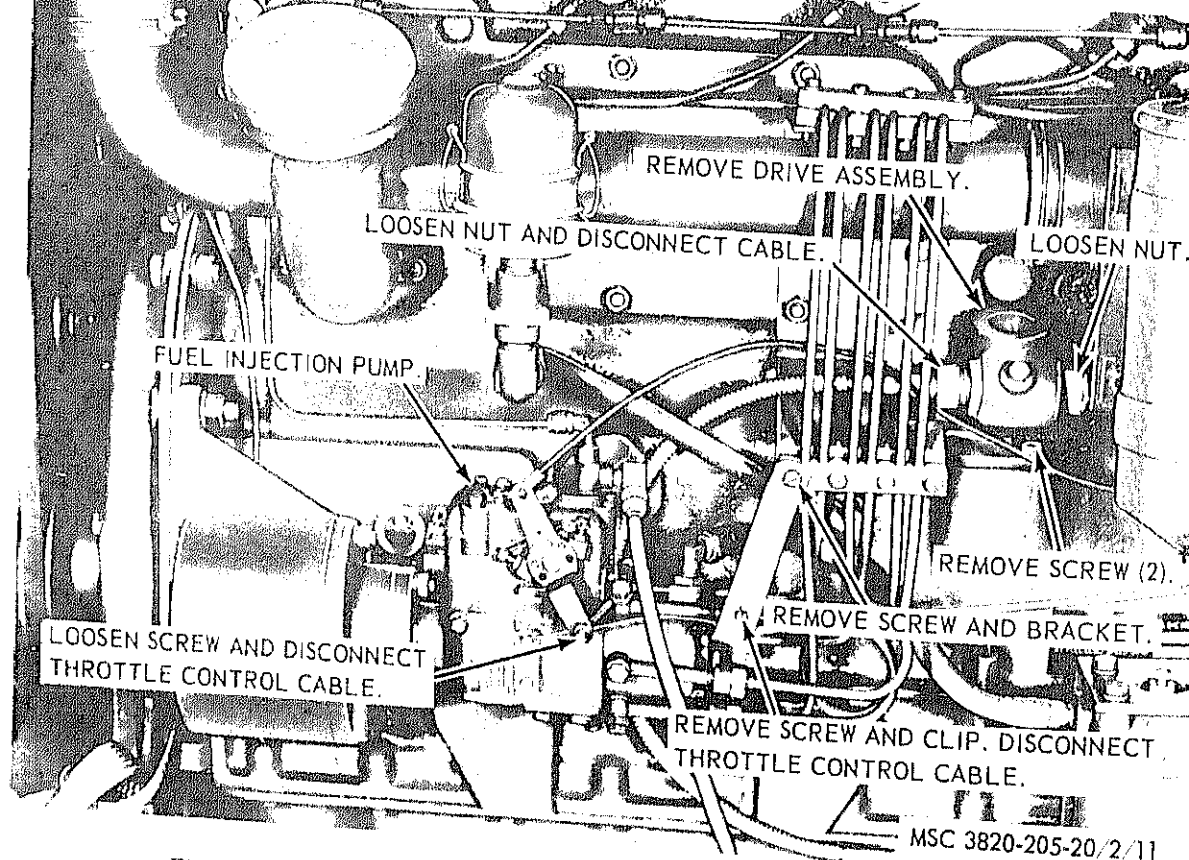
Throttle control cables and tachometer drive, removal and installation.
